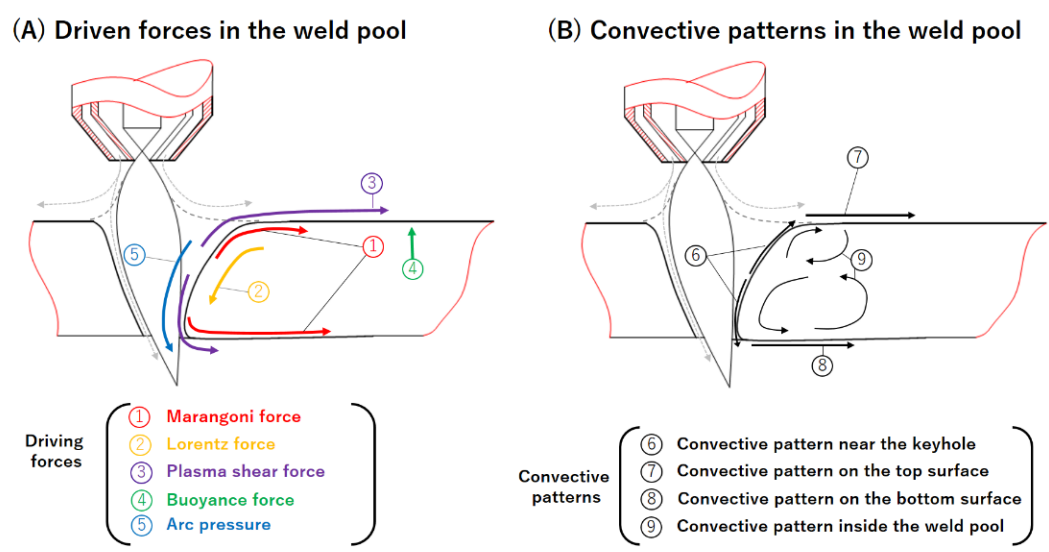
Schematic illustration of the main driven forces and convective patterns of the weld pool
